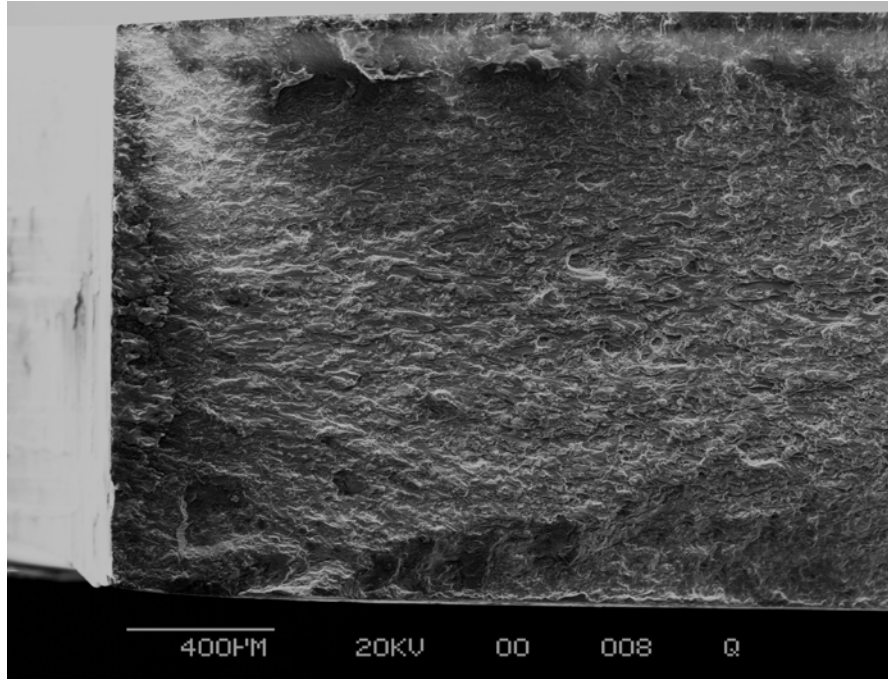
Fracture surface of specimen 5 showing crack initiation area
